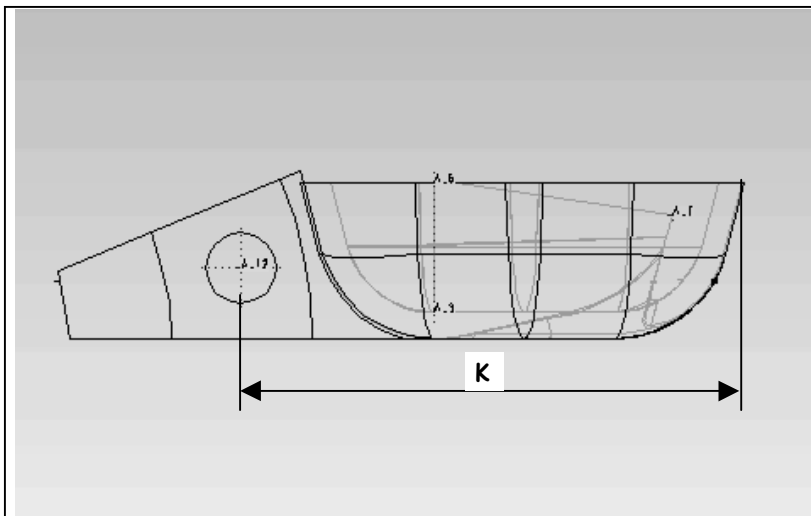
Use the end of the bucket as a reference for drilling the fixing hole. Dimensions for K are given in the key above and are applicable for buckets cast from patterns supplied by NTU. Ensure that this hole is drilled in an identical place on each bucket.
